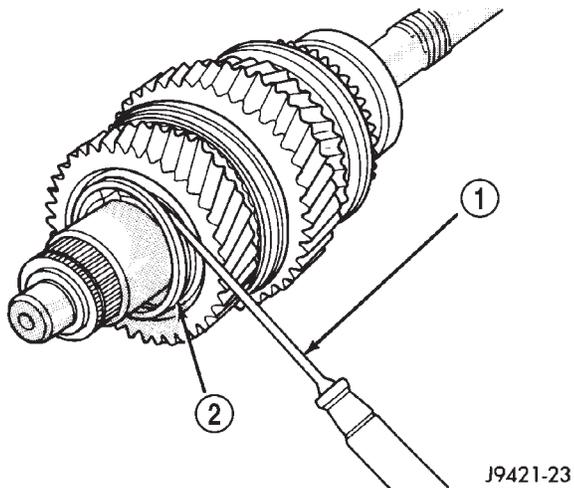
THIRD GEAR NEEDLE BEARING
